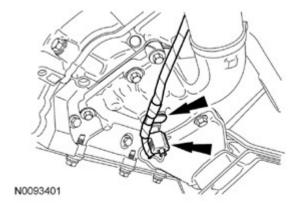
Locating Knock Sensor Electrical Connector Courtesy of FORD MOTOR CO.
